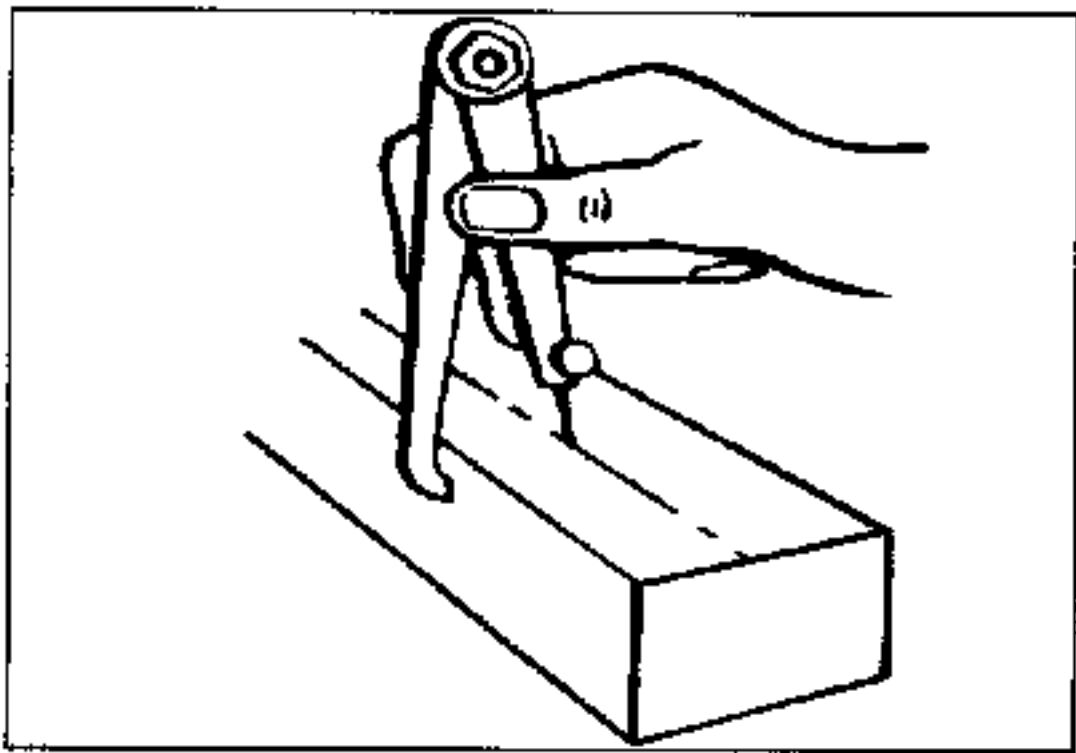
Laying out lines parallel to the edge of workpiece.
